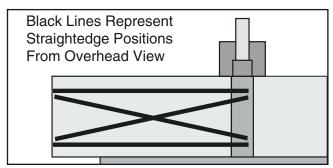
Straightedge positions for verifying if outfeed table is parallel with cutterhead.
